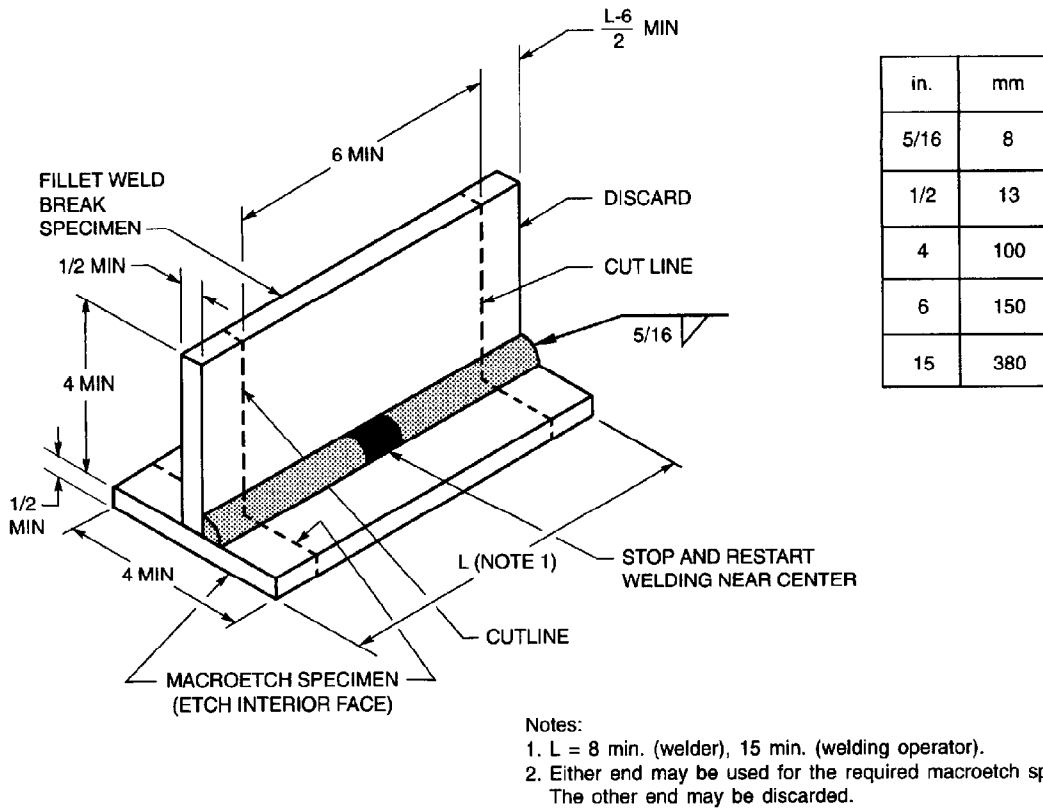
Fillet Weld Break and Macroetch Test Plate—Welder or Welding Operator Qualification—Option 1 (see 4.28 or 4.25)
